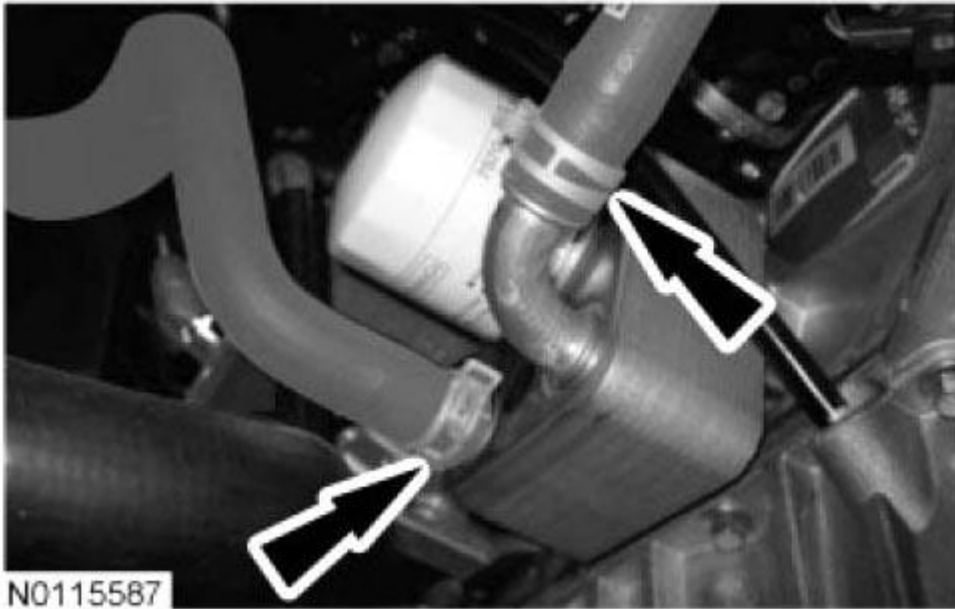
Locating Coolant Hoses From Engine Oil Cooler
